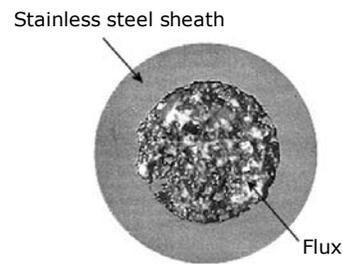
A cross sectional view of TG-X flux-cored filler rod.
